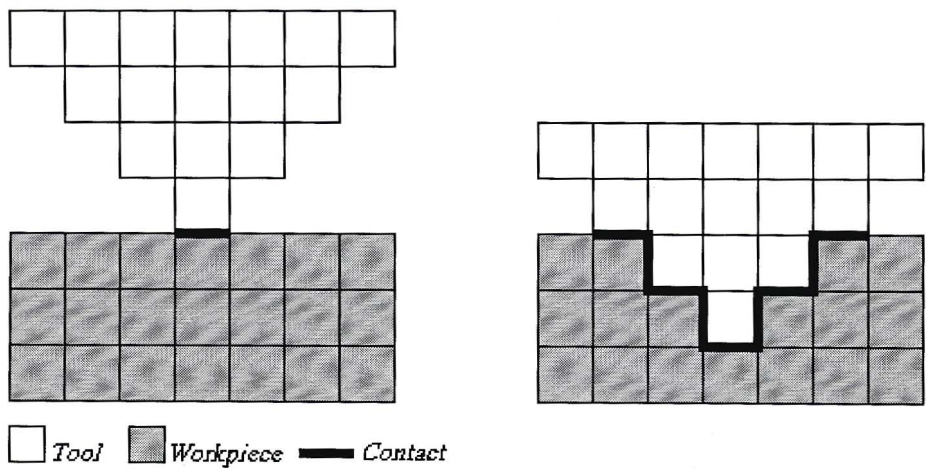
Cross-sectional area of the tool and workpiece, the contact represented by the thick black line.
